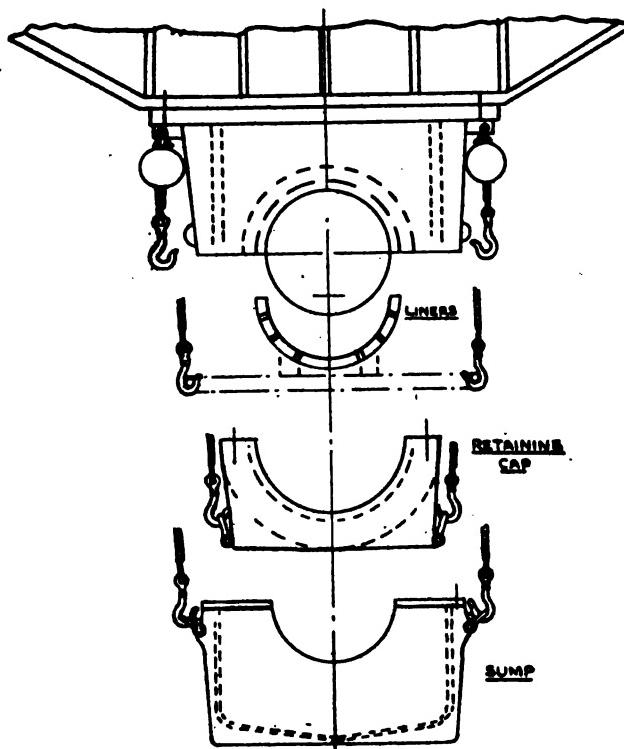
Arrangements for dismantling the underslung jackshaft bearing for the top forward twin drive. (Compare Fig. 10.) The lowering tackle is built into the machine
